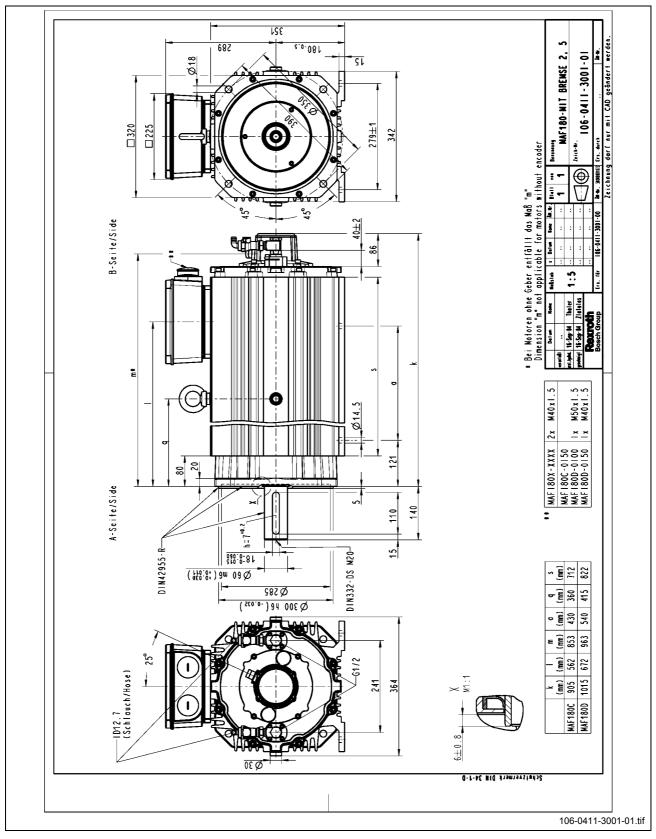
Dimension sheet for MAF180, with brakes 2 and 5
